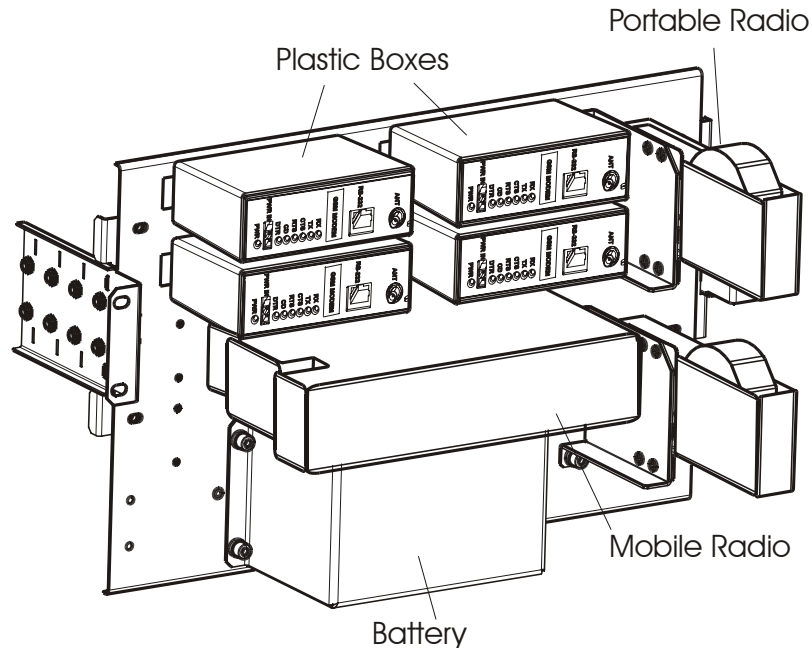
Installation of ACE3600 RTU 19" Rack Accessories - General View
